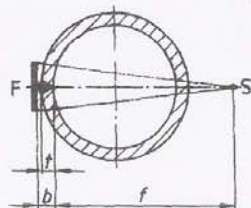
Test arrangement for double-wall penetration single image of longitudinal welds
